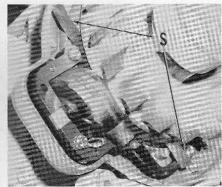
View showing method of checking air gap using shim stock (S).
